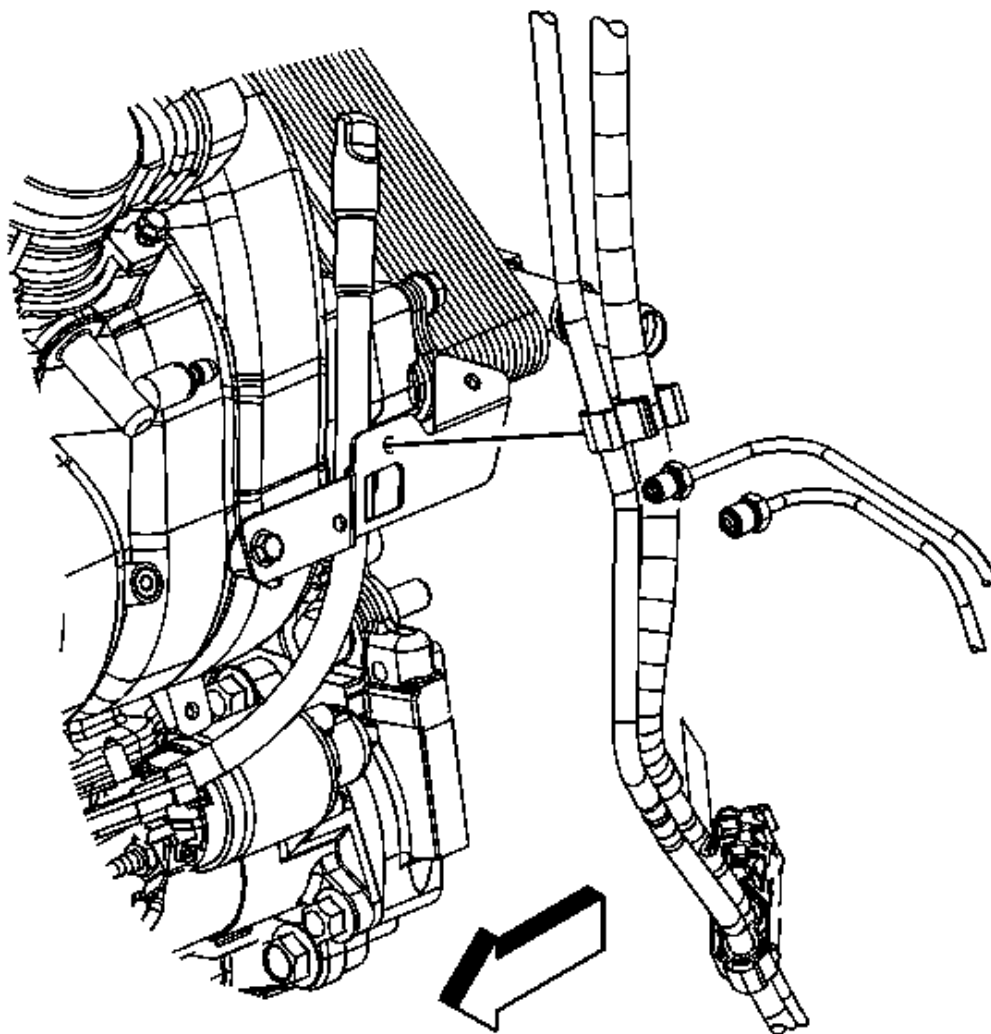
View Of Fuel Feed & EVAP Pipe Clip
